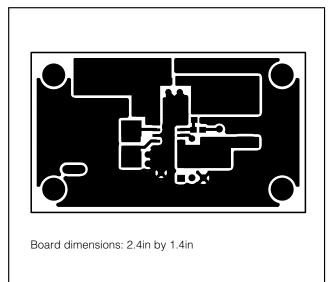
MAX889S EV Kit PC Board Layout—Component Side
